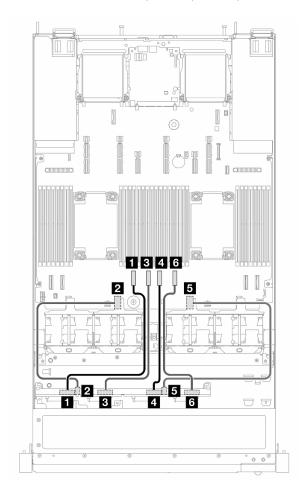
Cable routing for onboard configuration of 8 x 2.5-inch front NVMe drives
